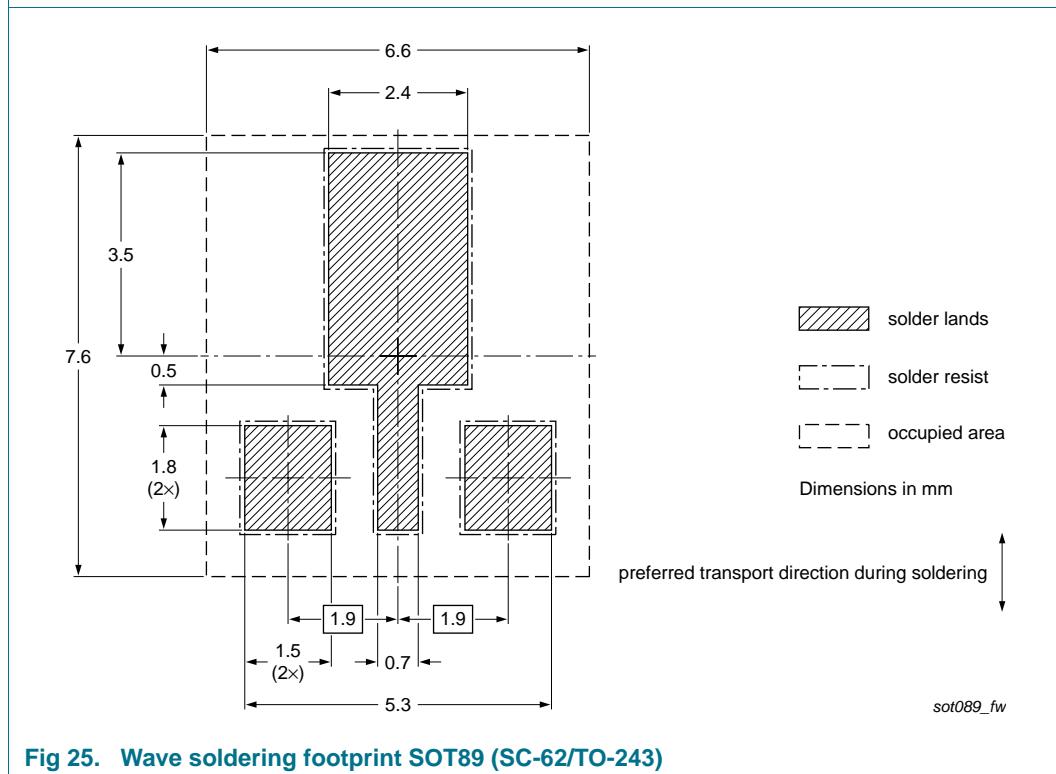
Wave soldering footprint SOT89 (SC-62/TO-243)
